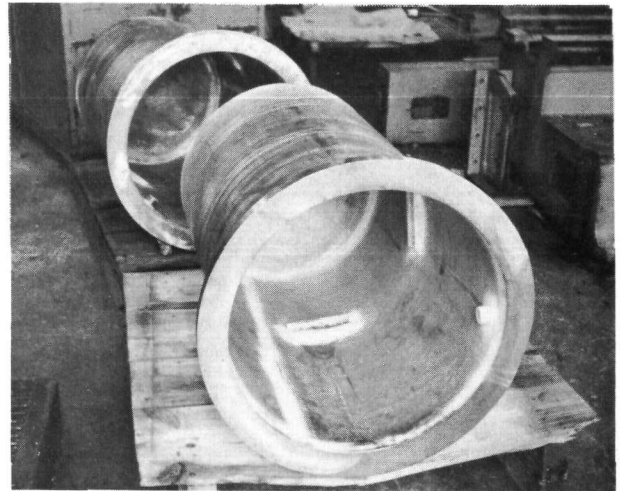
Dye penetrant examination of all welds on the cask body was performed.
